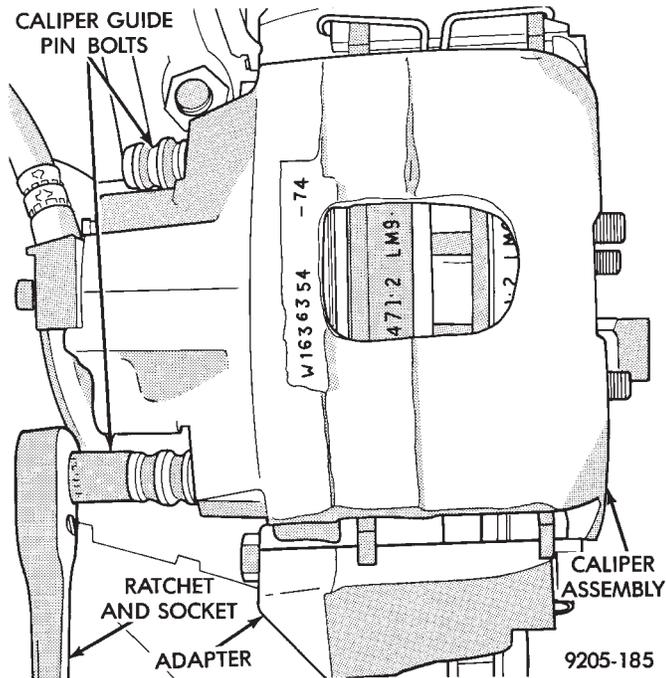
Removing or Installing Caliper Guide Pin Bolts
